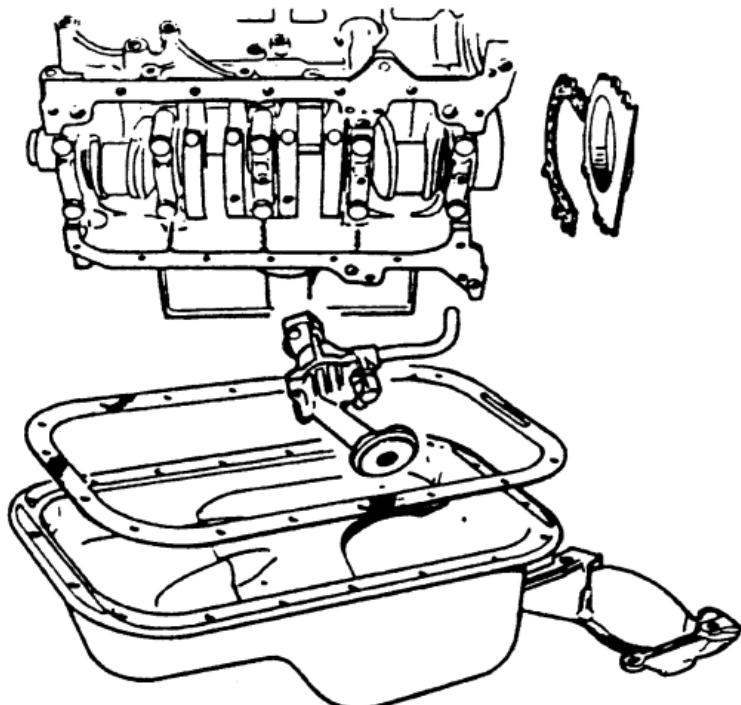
Exploded view of the oil pan, rear seal flange, oil pump, and delivery tube on B230F and B230FT engines
